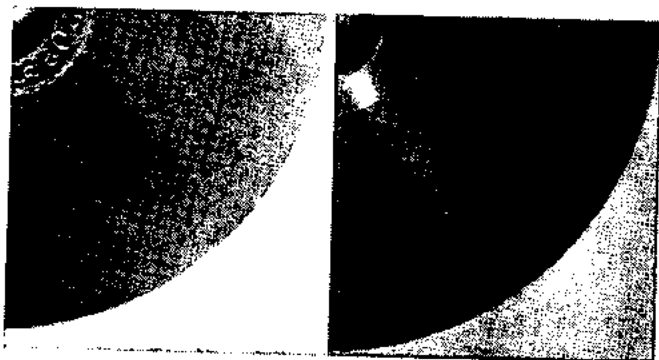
70-30 copper-nickel (0.5 Fe) discs with 70-30 welds after 60-day rotation test - left, 0.59 fe in weld; right, 6.25 fe in weld of 70-30.
